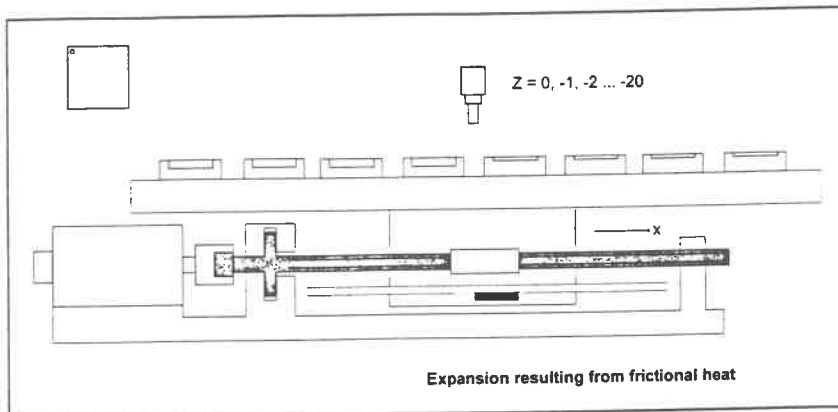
Experimental setup for batch production with multiple workpieces. To illustrate drift resulting from thermal expansion of the ballscrew, the workpieces were not exchanged after machining. Instead, the part program was run repeatedly at successively increasing depth.
